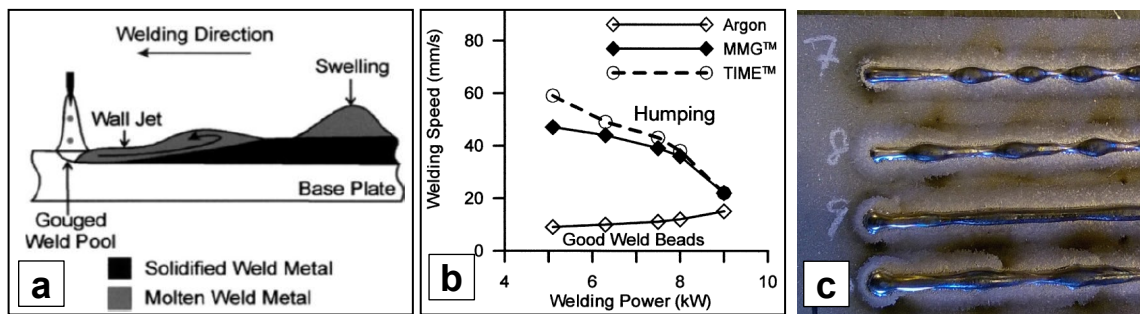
a) Schematic presentation of humping phenomenon. b) Plot of limiting welding speeds vs. welding powers for varying shielding gas [155]. c) Example of severe humping of alloy 625 single bead on plate welds. TS 1200 mm/min, shielding gas 100%Ar, set WFS: 7, 8, 9 and 10 m/min.
